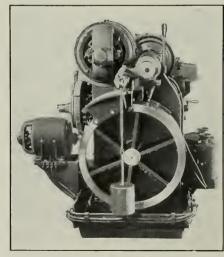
Gridley Motor Operated Turret Lathe (End View)
